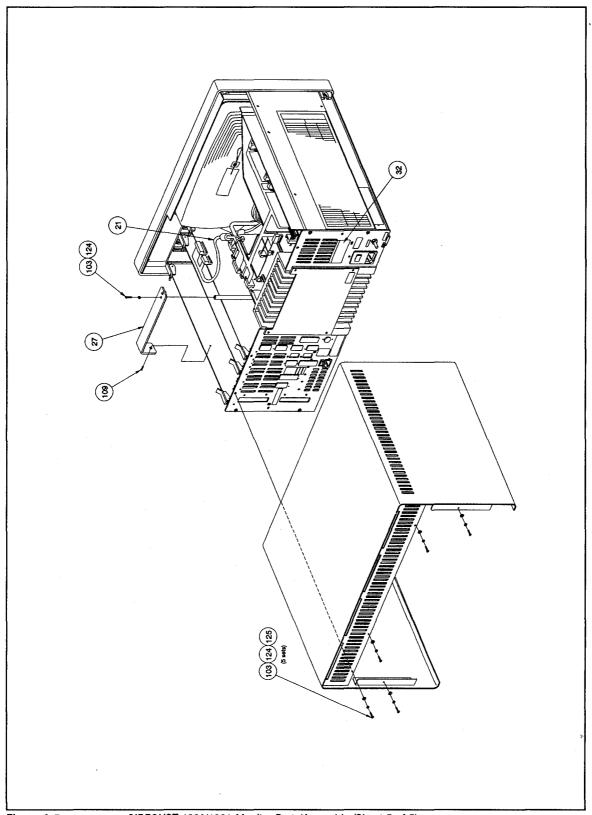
SIRECUST 1280/1281 Monitor Parts/Assembly (Sheet 5 of 5)
